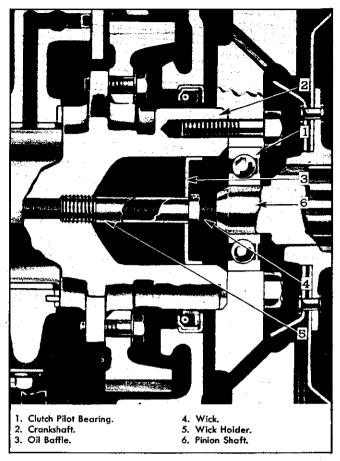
Oil Lubricated Pilot Bearing Installation.
